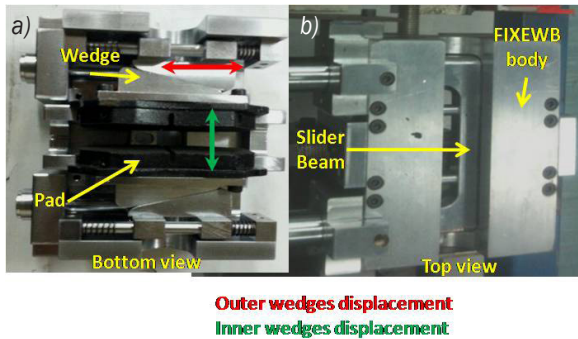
FIXEWB hardware, a) bottom view and b) top view
